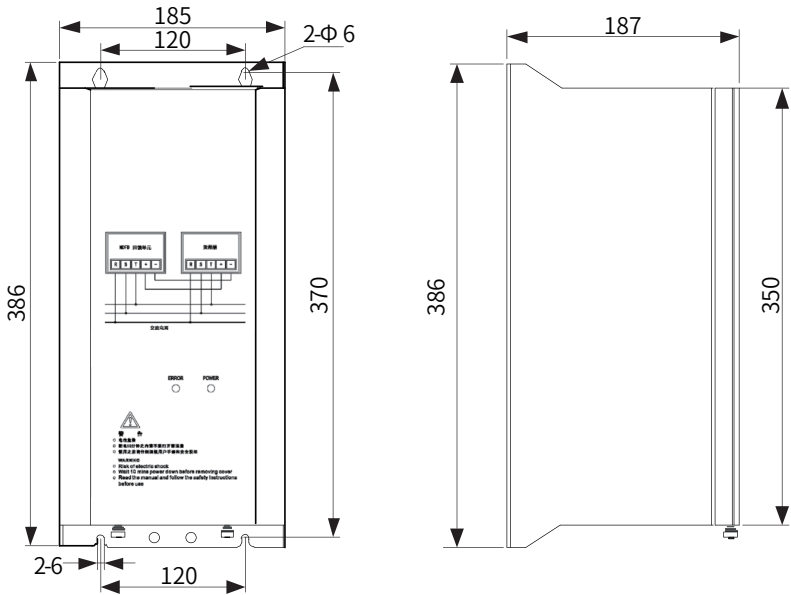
Overall dimensions of the MDBU series braking unit (MDBU-200-X) (unit: mm)
